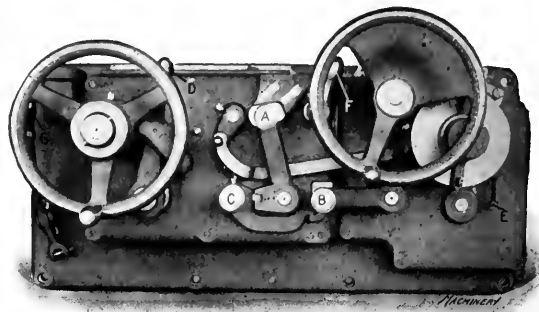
Control Mechanism of Table Feed on Pratt & Whitney Surface Grinder
